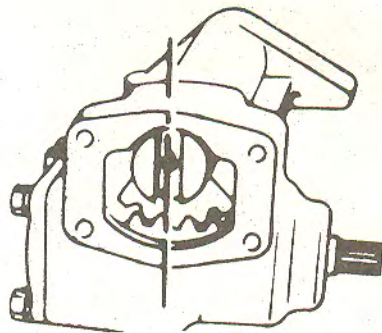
When assembling the steering, take care to line up the toothed sector and the steering nut as shown.
